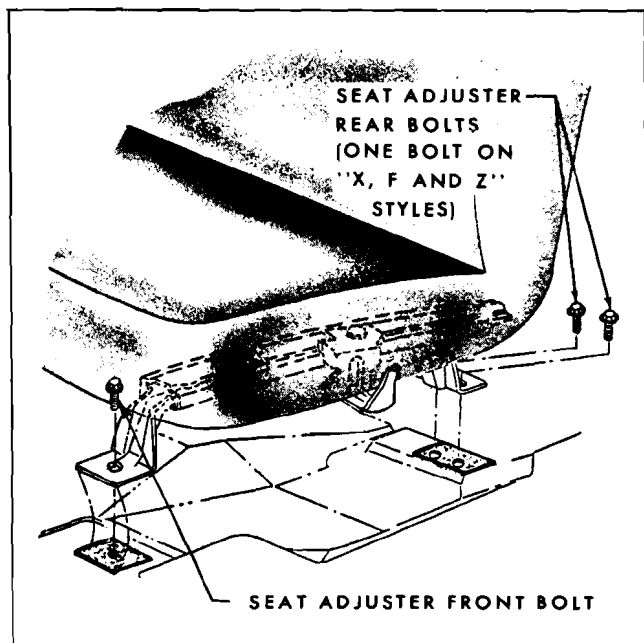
Seat Adjuster Floor Pan Attachment - "A, F, X and Z" Body Full Width Seats
